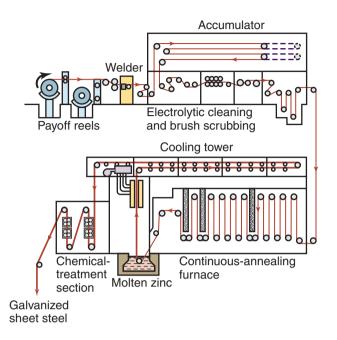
Flow line for the continuous hot-dipped galvanizing of sheet steel. The welder (upper left) is used to weld the ends of coils to maintain continuous material flow. *Source:* Courtesy of the American Iron and Steel Institute.
